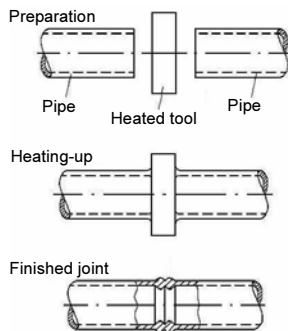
Principle of heated tool butt welding using the example of pipes.
